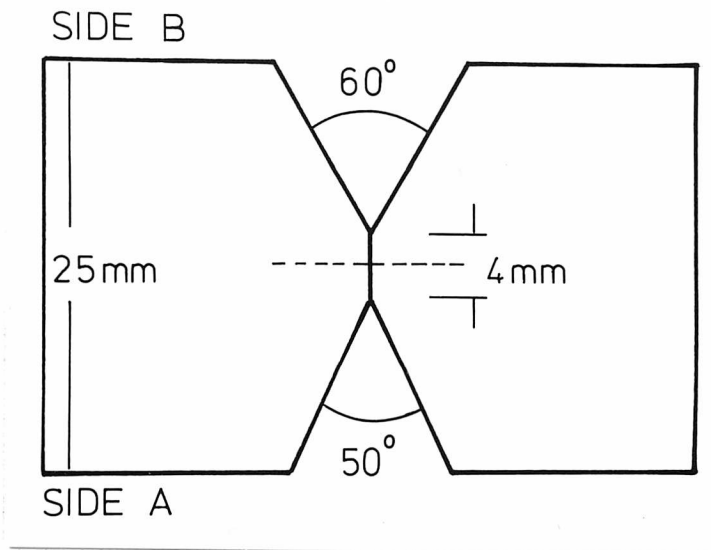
Joint preparation for two pass submerged arc welding
